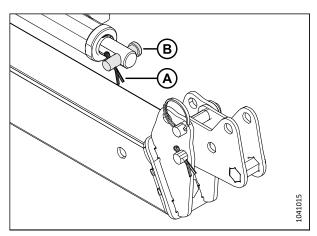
Shipping Location of Pins in Right Fore-aft Cylinder
